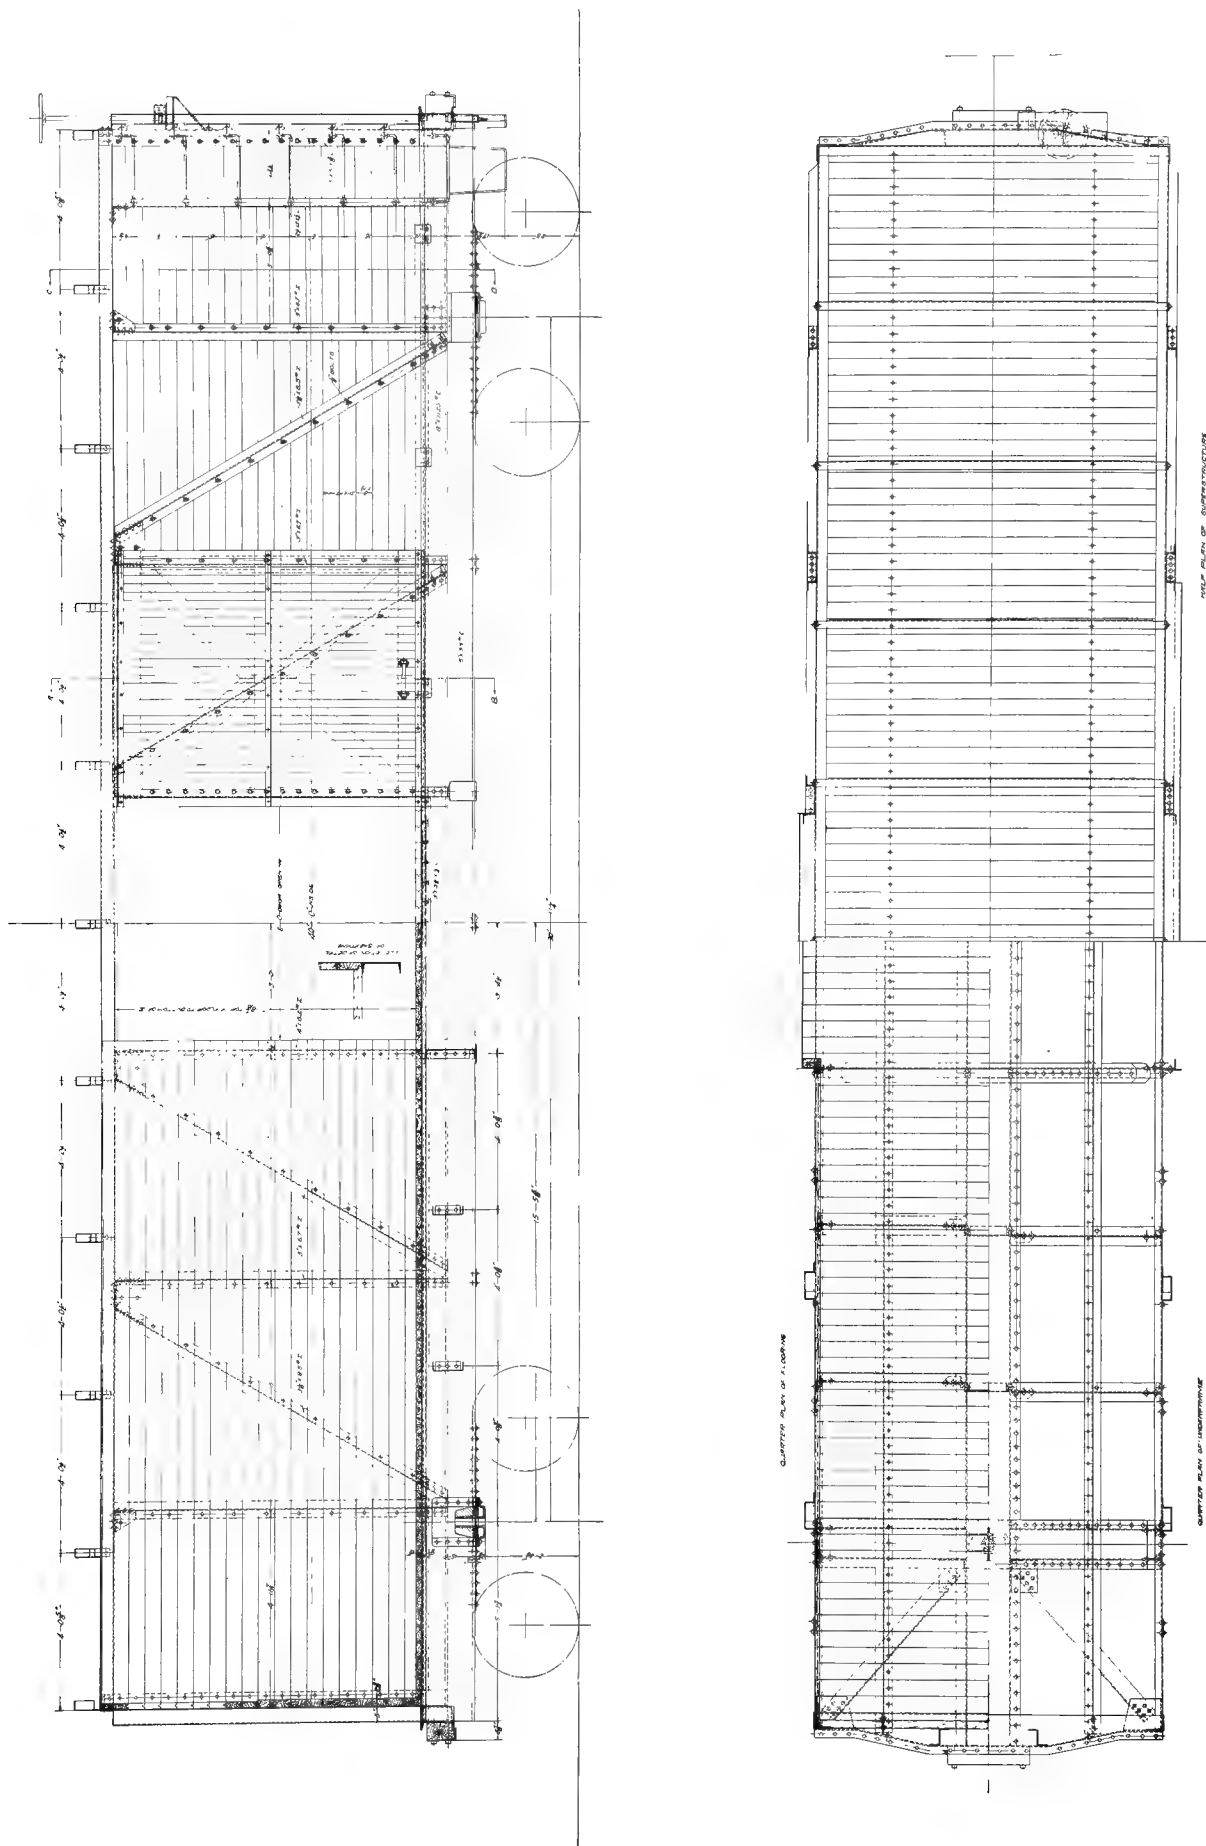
Steel Frame Box Car Shown in Figs. 11 and 273. Built Under the Fowler Patents.
